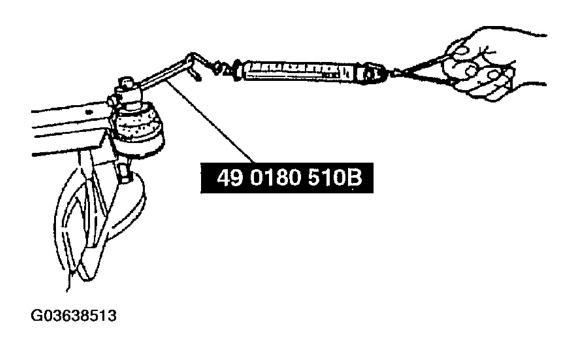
Measuring Rotation Torque Of Ball Joint Courtesy of MAZDA MOTORS CORP.
